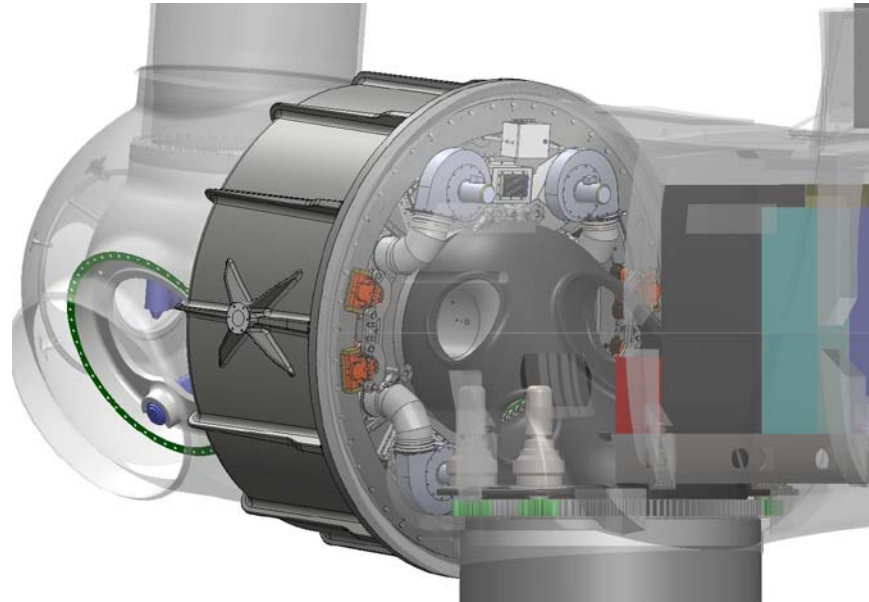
One approach to integrate the outer rotor PM machine with a wind turbine.
